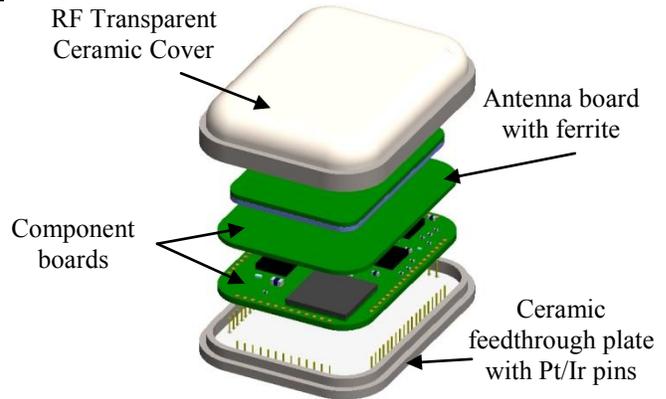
EXPLODED VIEW OF THE HUB SYSTEM ELECTRONICS PACKAGE.
